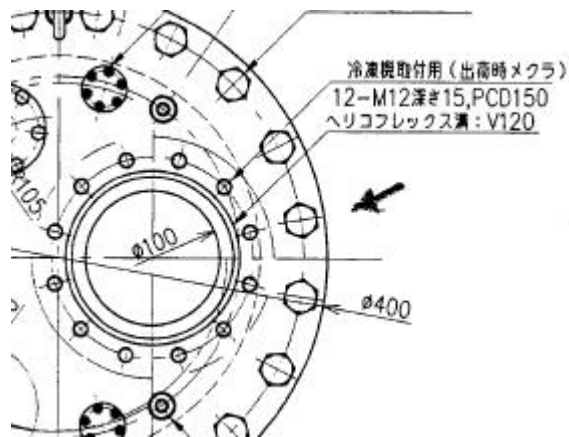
Part of the drawing of the large prototype. The pulse tube refrigerator is installed in the 100mm diameter hole and fixed on the cover with twelve M12 bolts. Depth of the screw hole is 15mm. The groove for the metal gasket (helicoflex) is V120.
